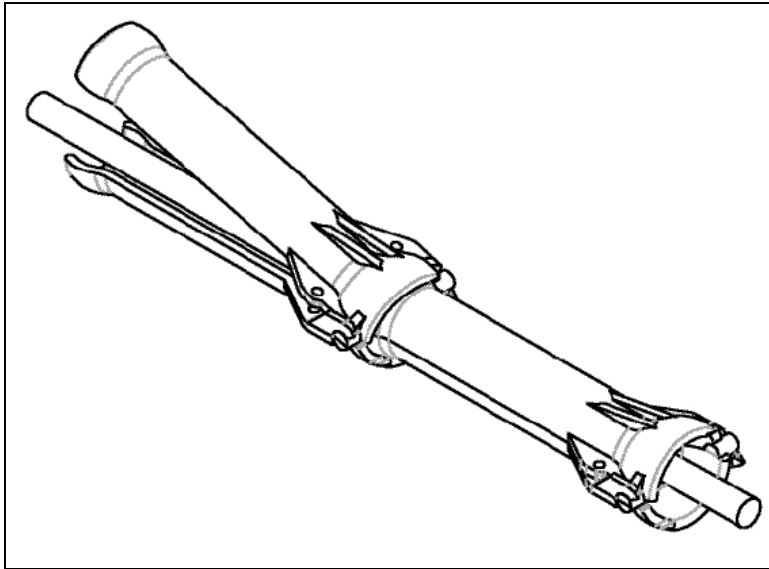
ARTICULATED PIPING TO PROTECT THE SUBMARINE CABLE
